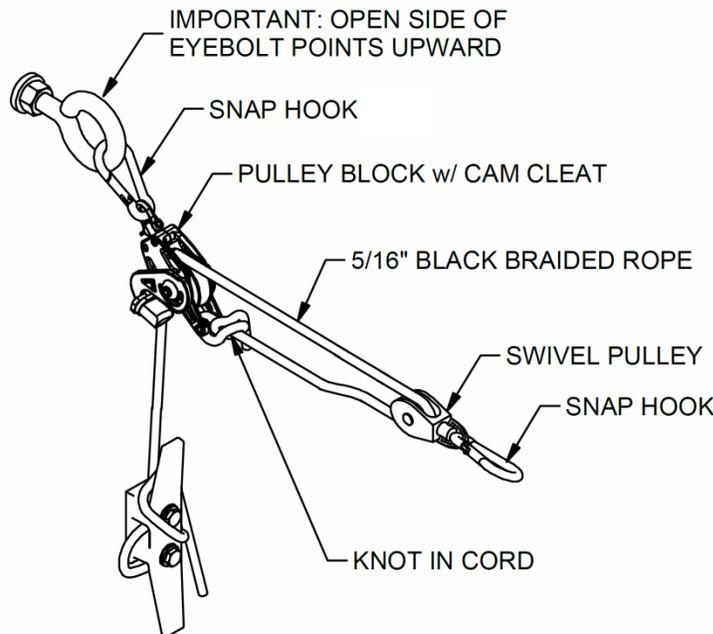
Optional Wall Mounting Kit – For CMU and Studded Walls
